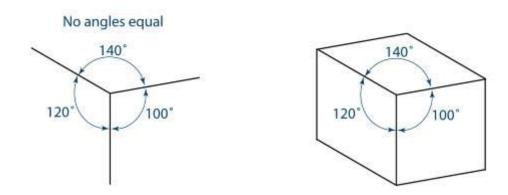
A trimetric drawing presents the three visible normal surfaces (frontal, horizontal, and profile) of a prism in a position where none of the angles between the surface edges is equal.
